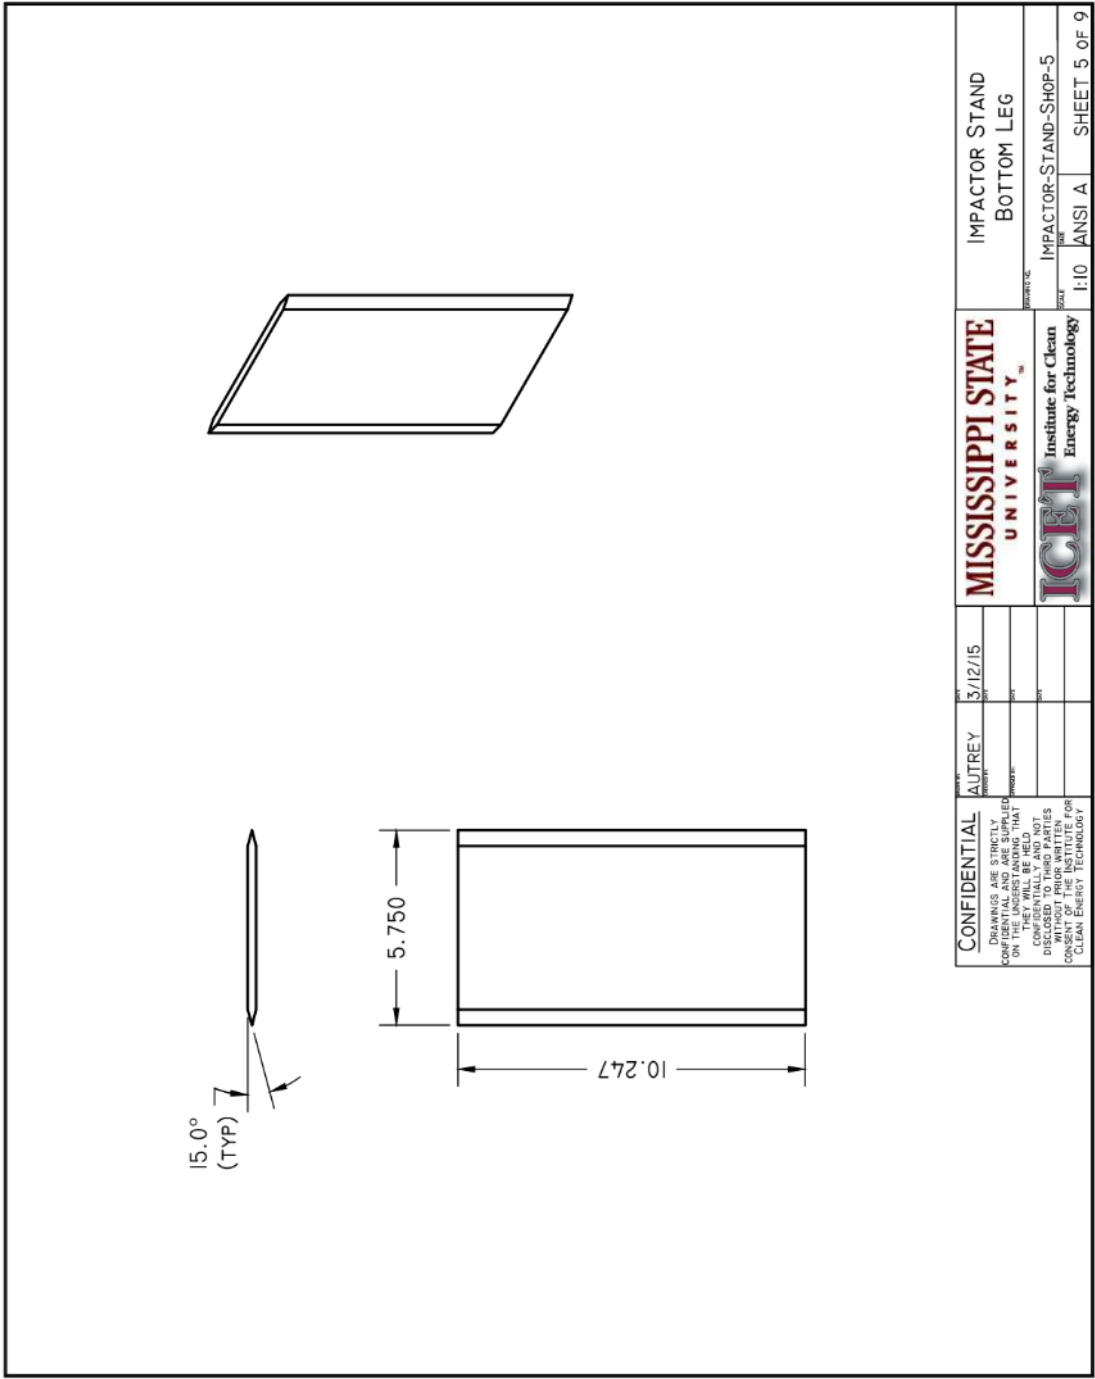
CAD drawing of the vertical Pilat impactor stand legs.
